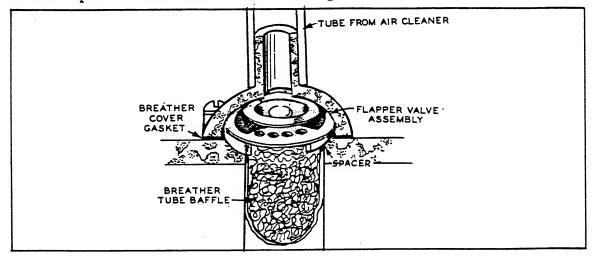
A - SERVICING CRANKCASE BREATHER VALVE
